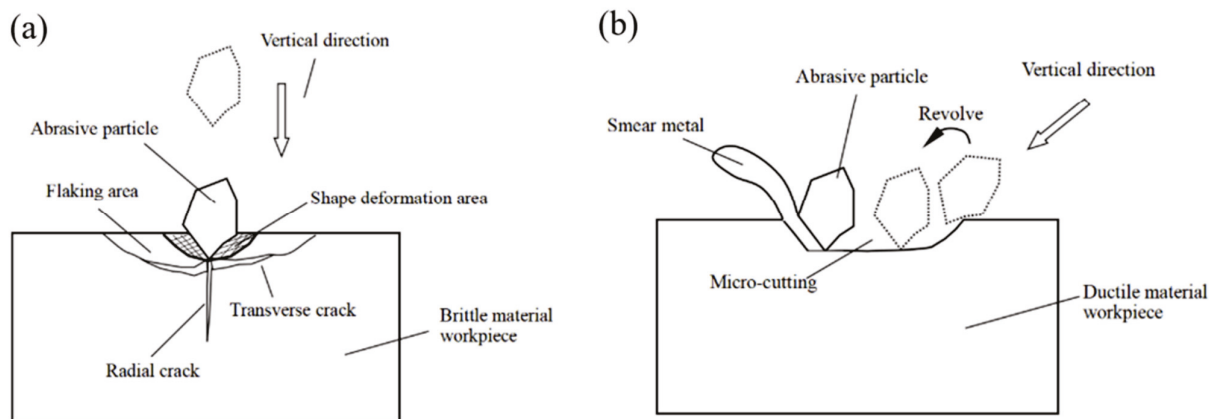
Material removal mechanism in (a) brittle material and (b) ductile material [39].
